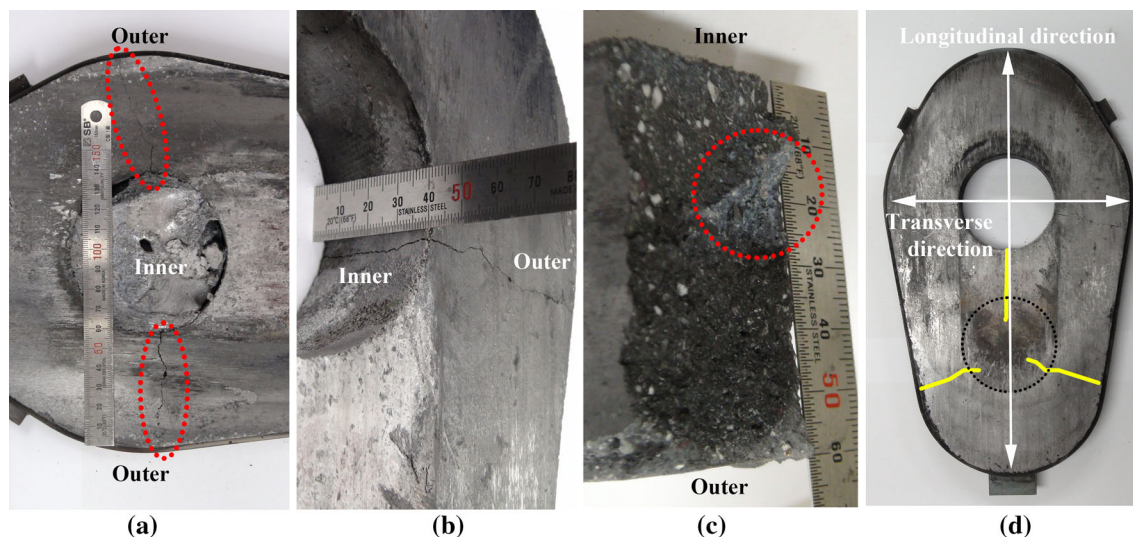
Type of cracks: (a) bottom view of used middle plate and common cracks, (b) photo of common through-thickness crack, (c) fracture surface of common crack, (d) schematic of rare radial/transverse crack locations and the area contacting molten steel during the tundish-filling stage.
